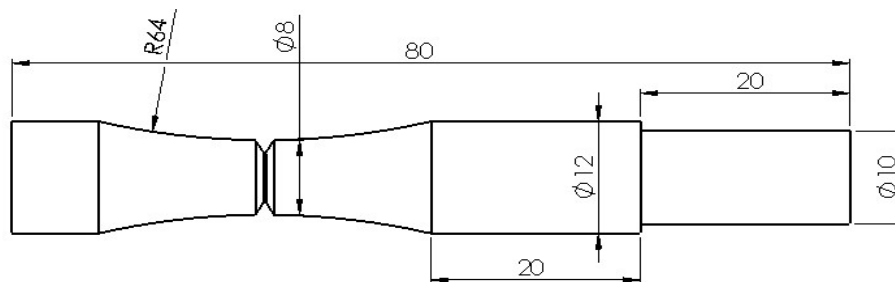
The dimension of the fatigue test specimen according to ASTM E466M standard
